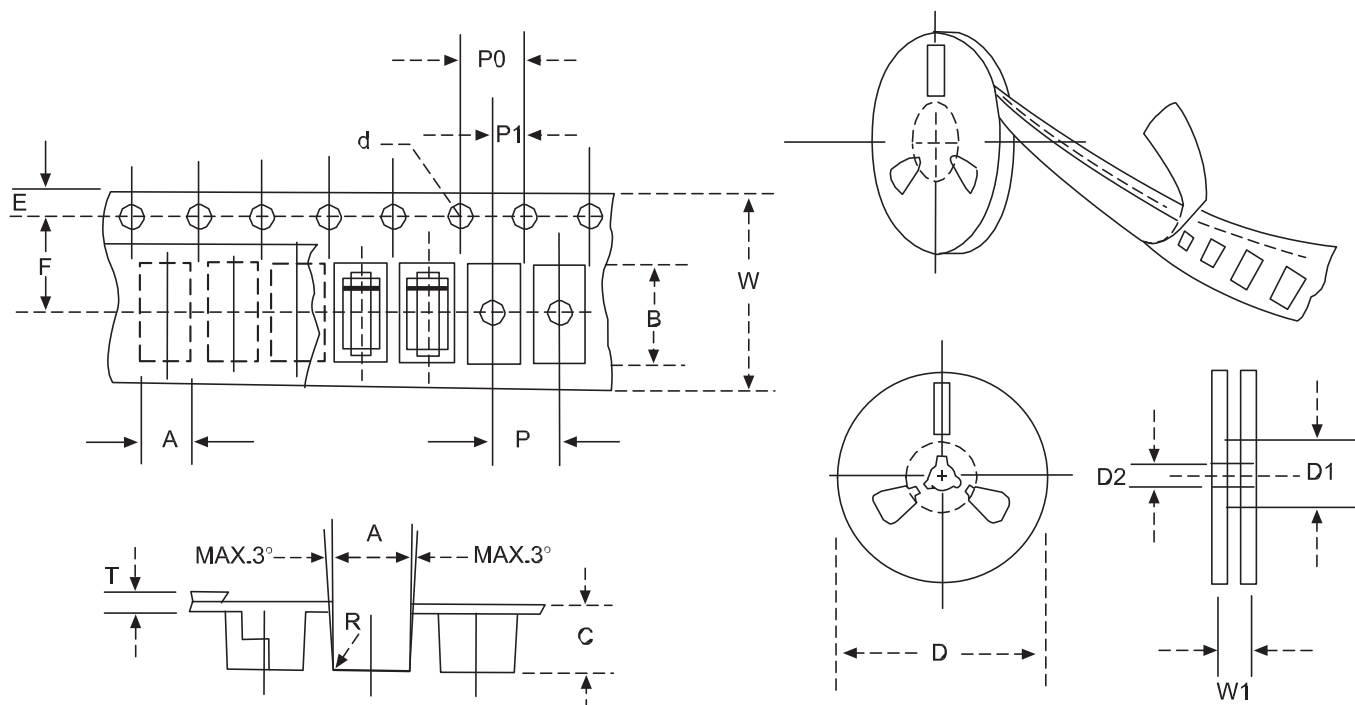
FIG:CONFIGURATION OF SURFACE MOUNTED DEVICES TAPING
